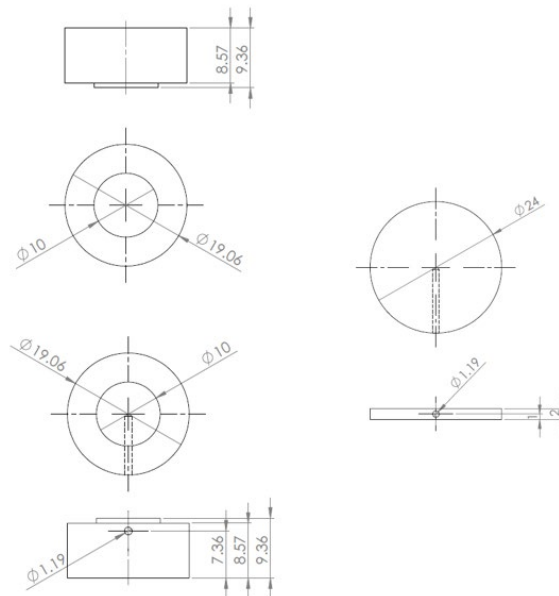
8 Schematic view of (left) upper and lower dies and (right) blank (all dimensions are in mm).
